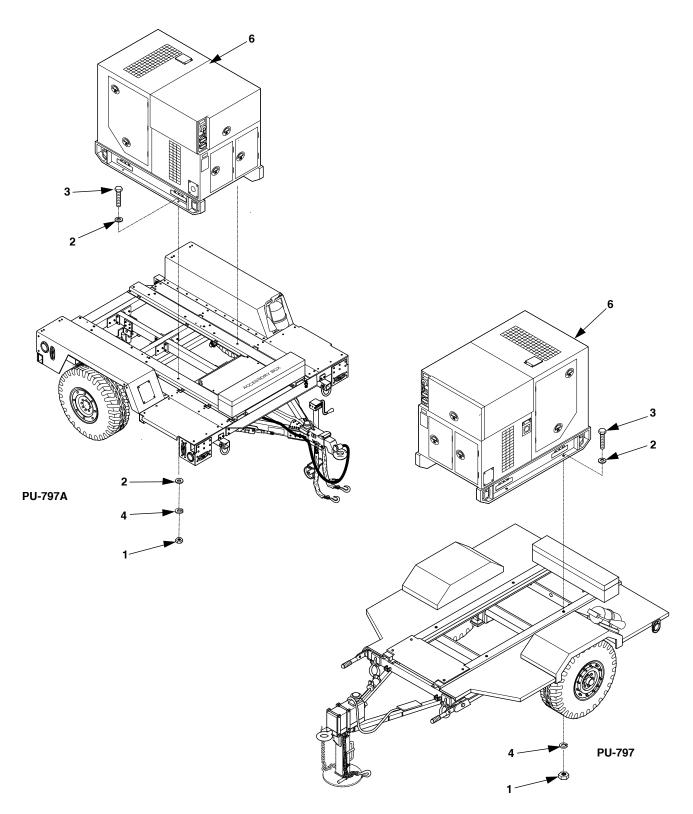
Removing Generator Set Mounting Hardware (Sheet 2 of 2).
